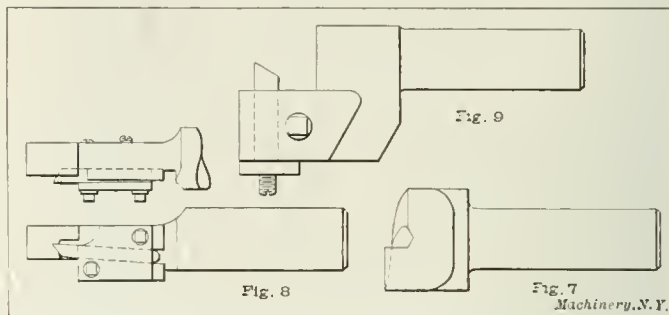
Formed Facing Tool for Roughing the Sides. Fig. 8. Single-point Tool for Angular Recesses. Fig. 9. Outside Roughing Tool using Cutters Interchangeable with those in Fig. 8
